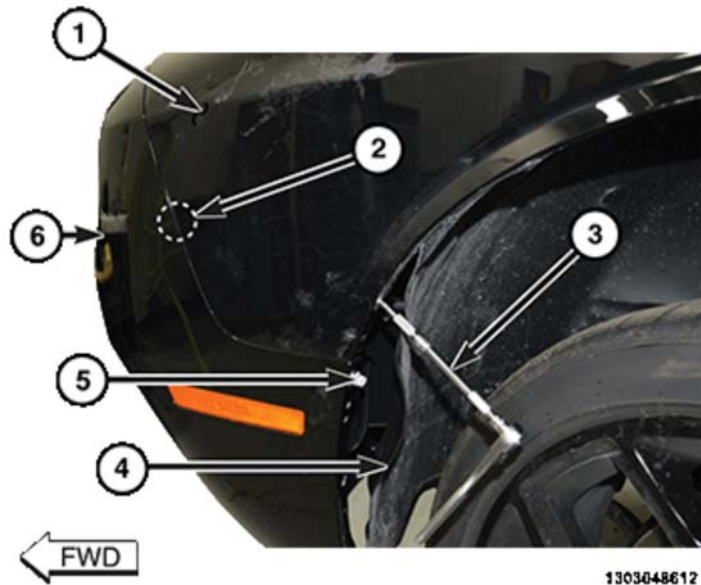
Splash Shield, Tool, Hidden Nut & Bolt
